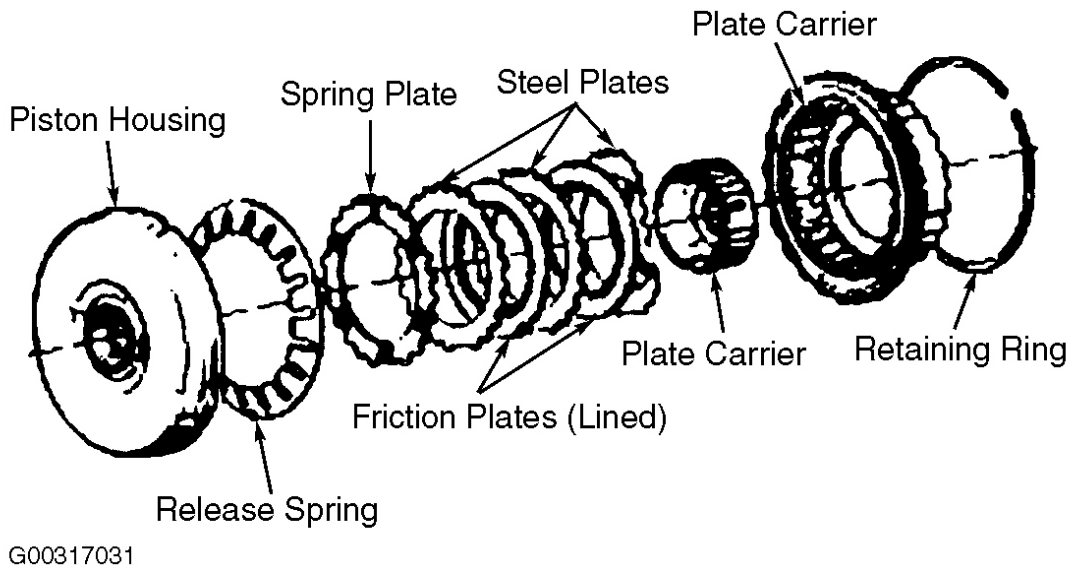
Identifying Multi-Plate Clutches & Brakes
